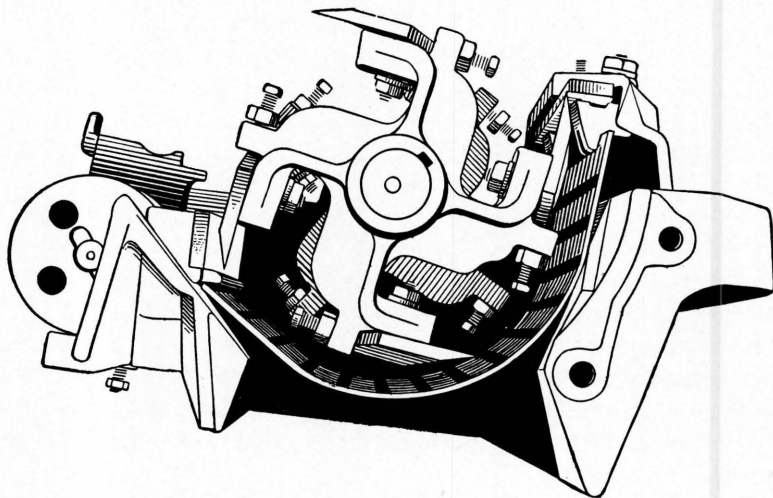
Type of cutter head commonly used on combination mills of the burr type
